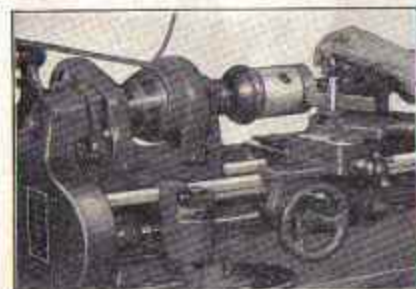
Turning Ring Lands to Size on a Semi-Machined Piston
